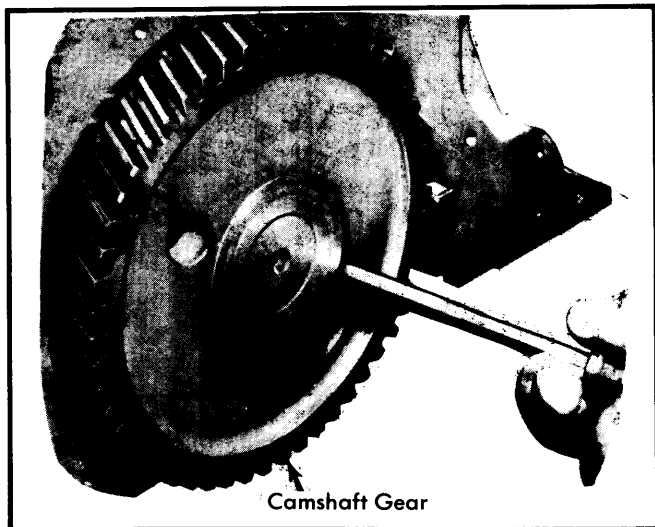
Removing Thrust Plate Screw with Screwdriver Inserted Through Timing Gear
